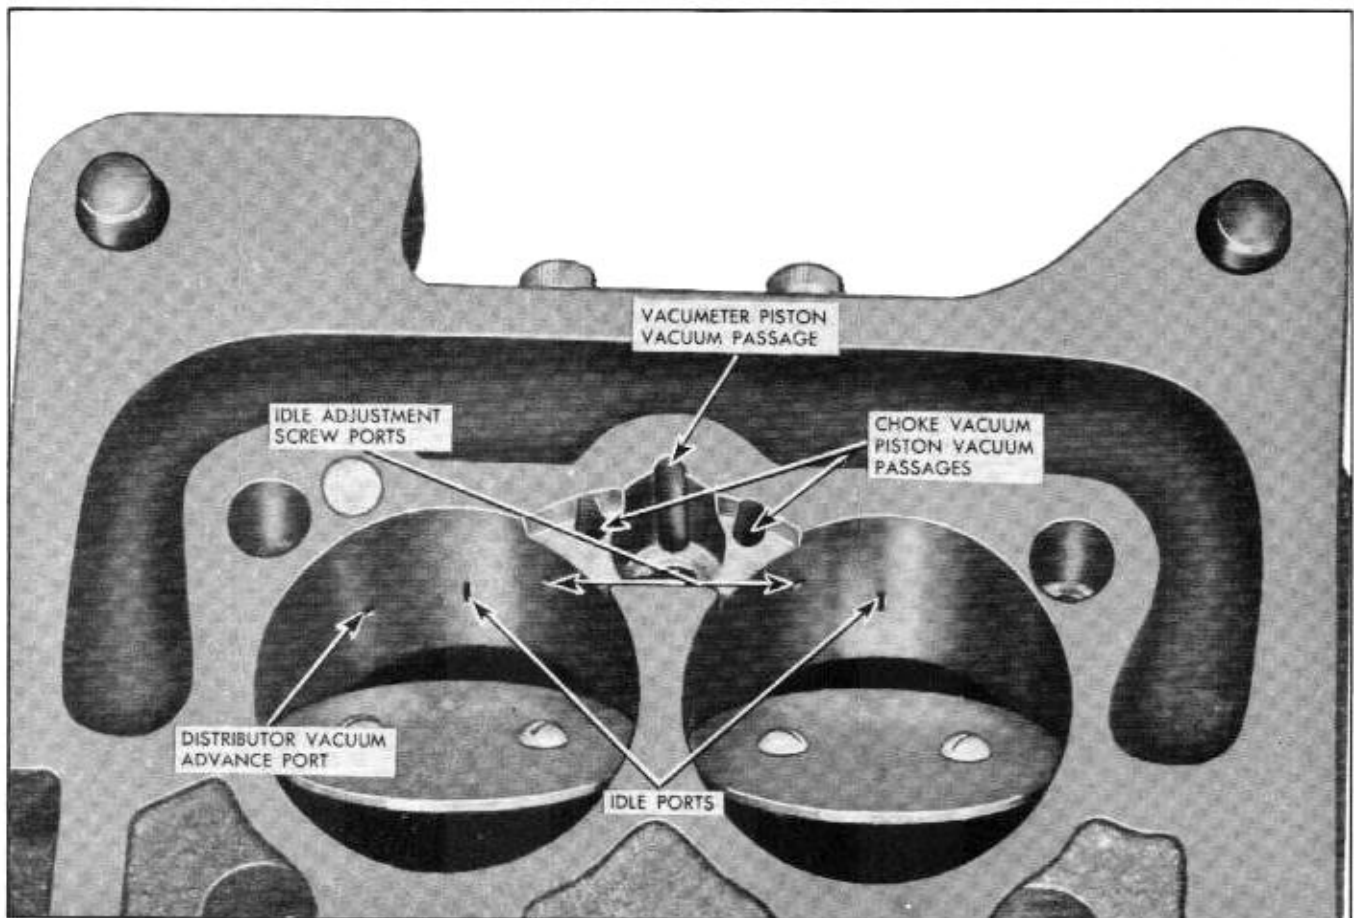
B-16 Passage at Manifold Side of Throttle Flange
